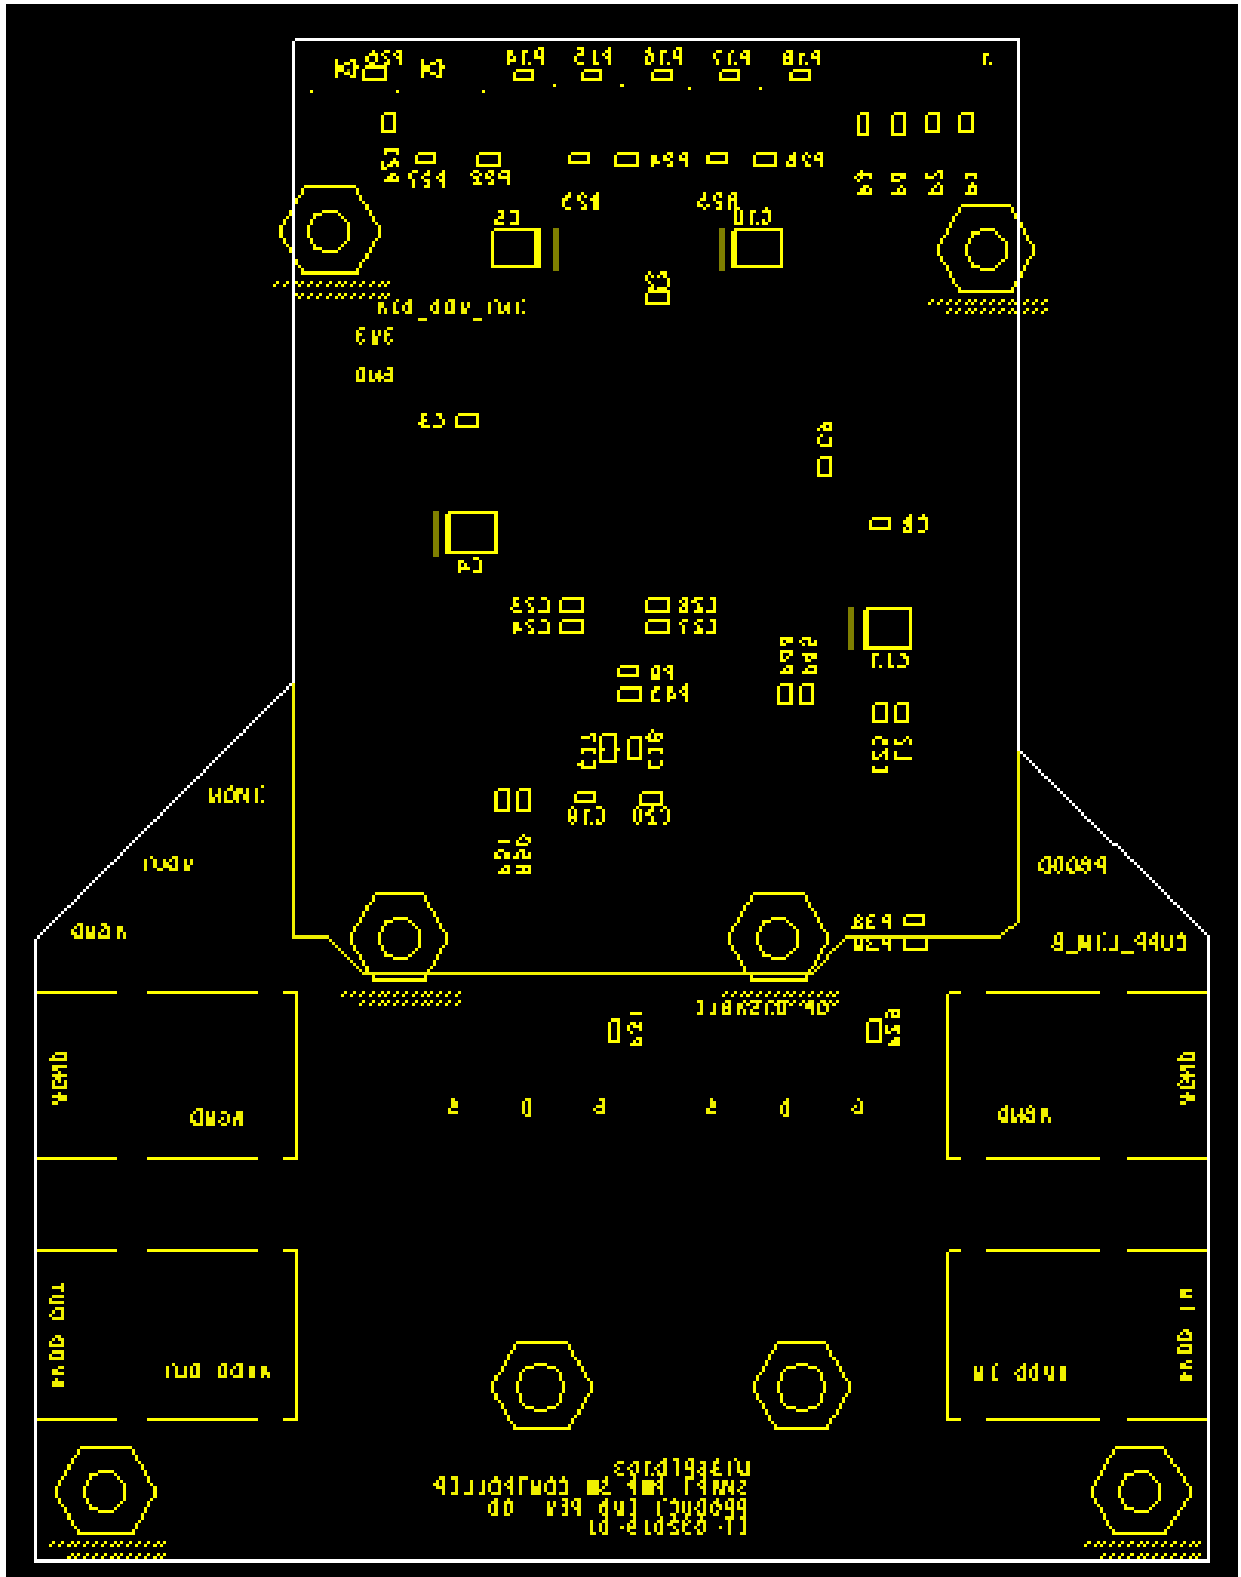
SPSC-EVB-R0 Assembly Bottom View
